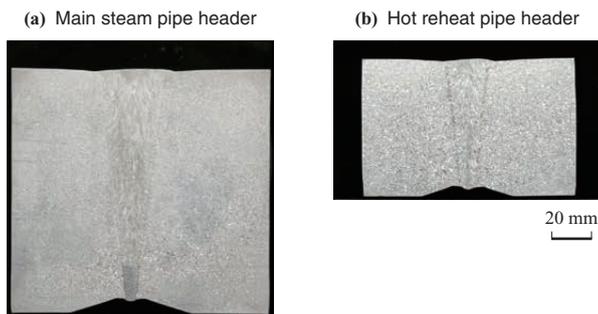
Cross-section of the macrostructure of HR6W circumferential welds
